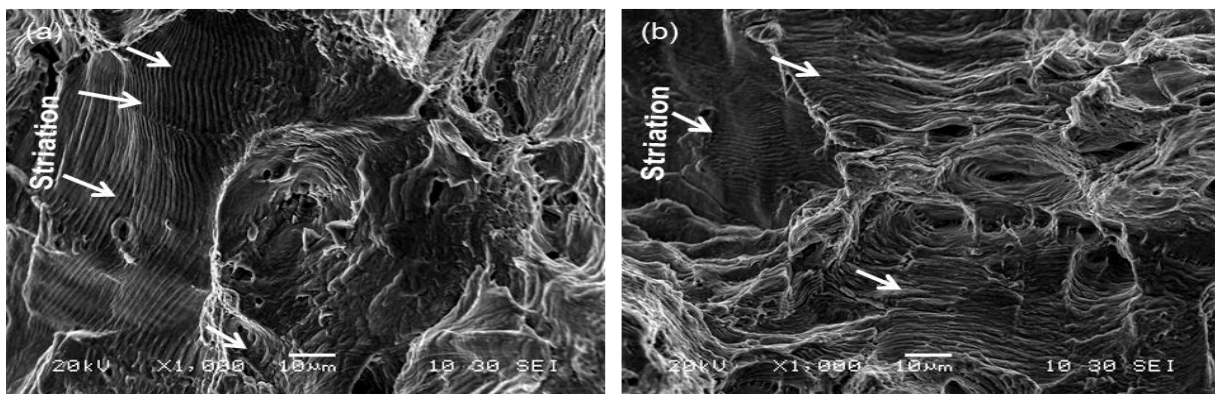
Typical striations observed on fatigue fracture surface of alloy C22 (a) and (b)
